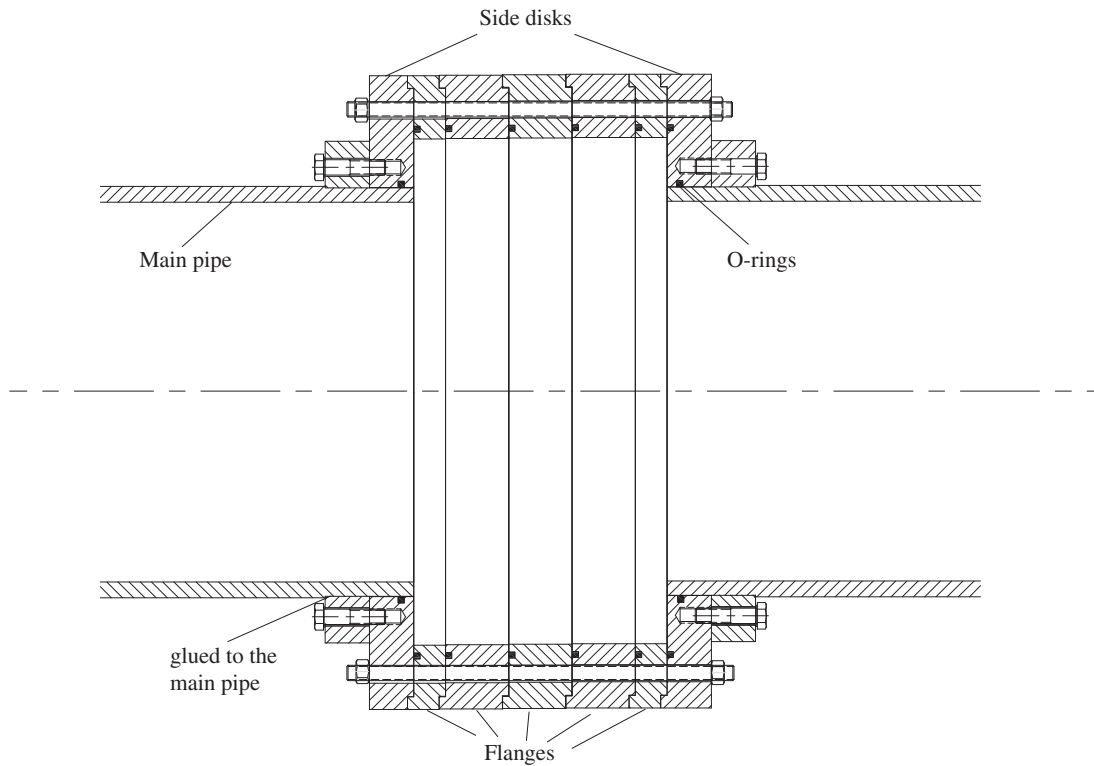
Schematic drawing of the cavity design. Cavity depth is 25 mm and cavity length is 100 mm.
